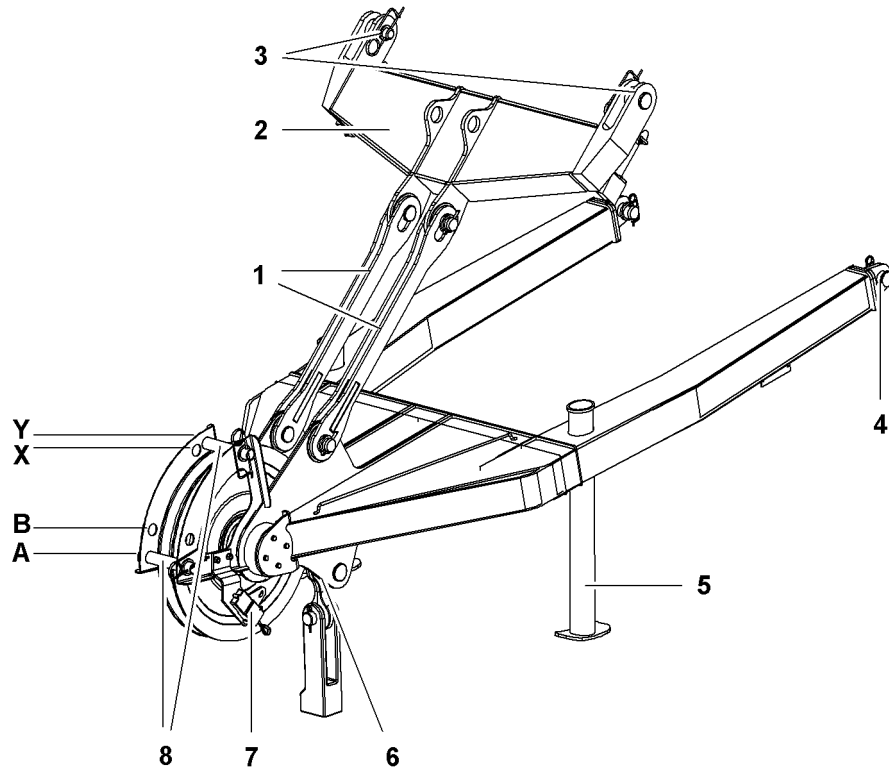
Auxiliary jib (79300 lb) for the boom head section
